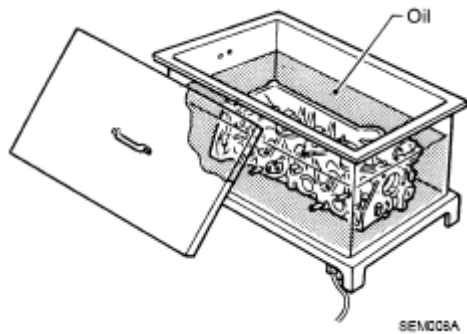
Heating Cylinder Head By Soaking In Heated Oil
